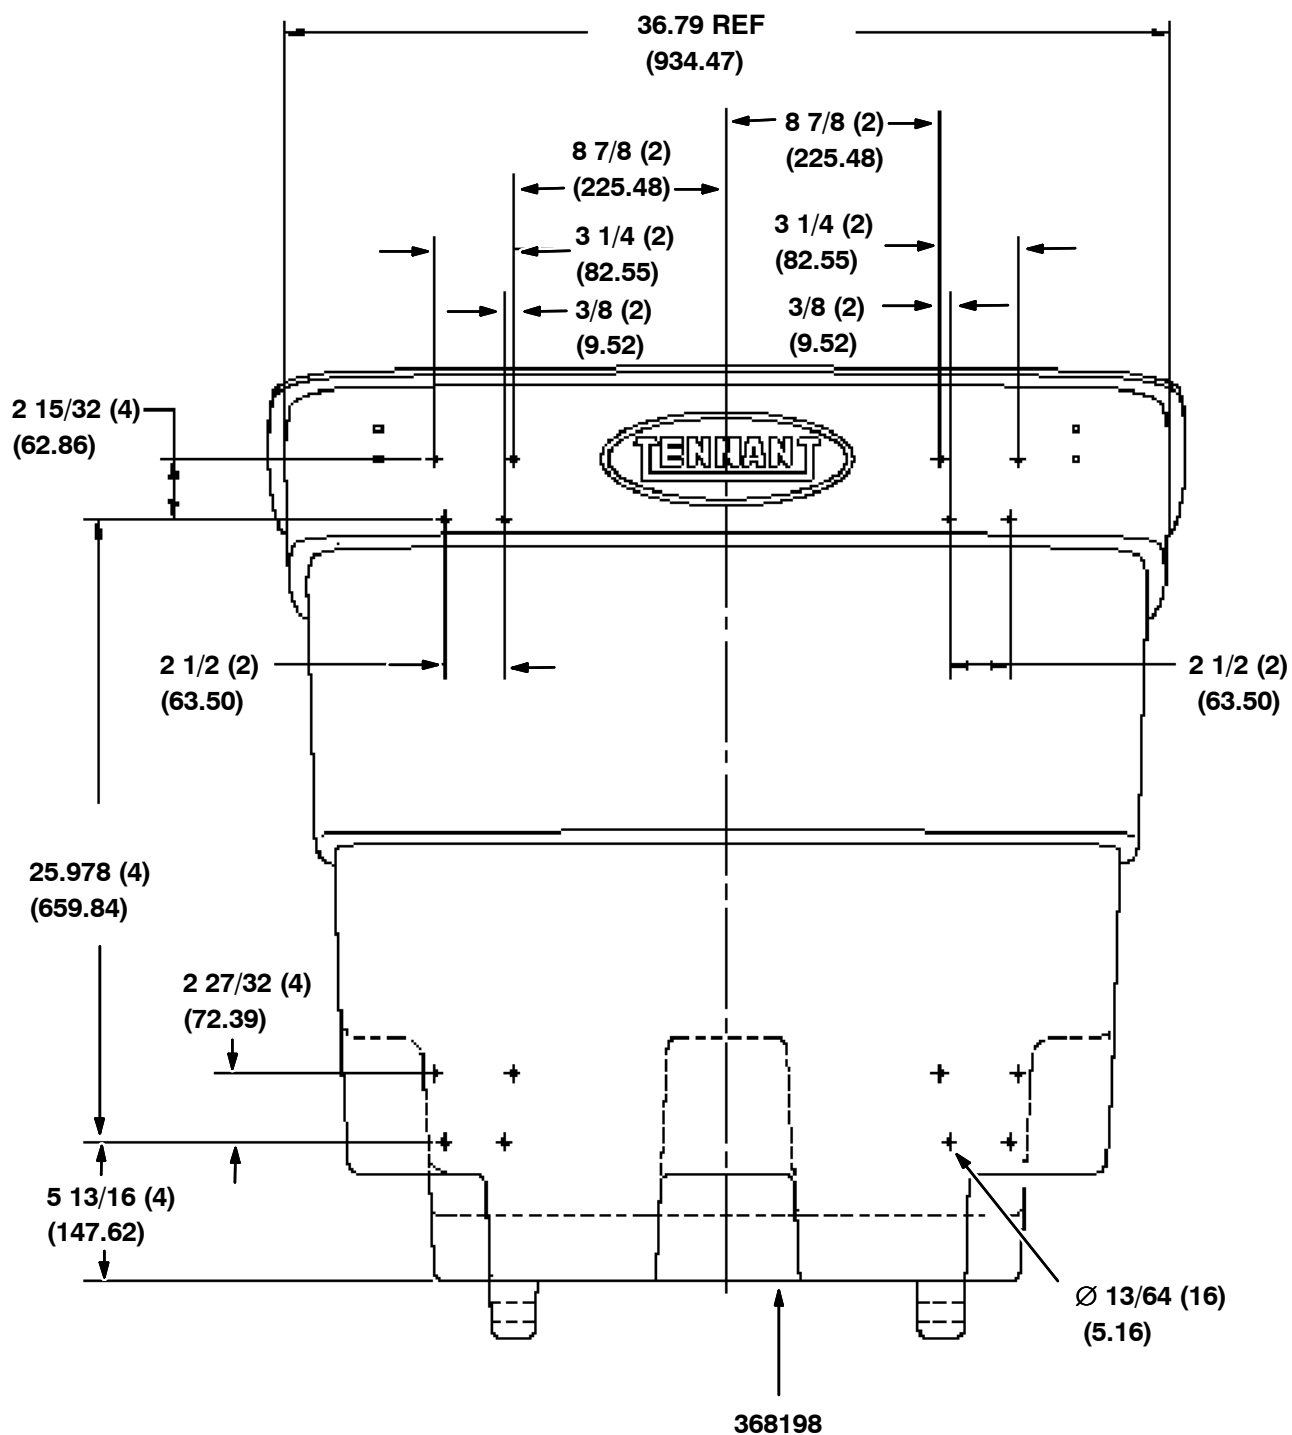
MOUNTING BRACKET HOLE DIMENSIONS
